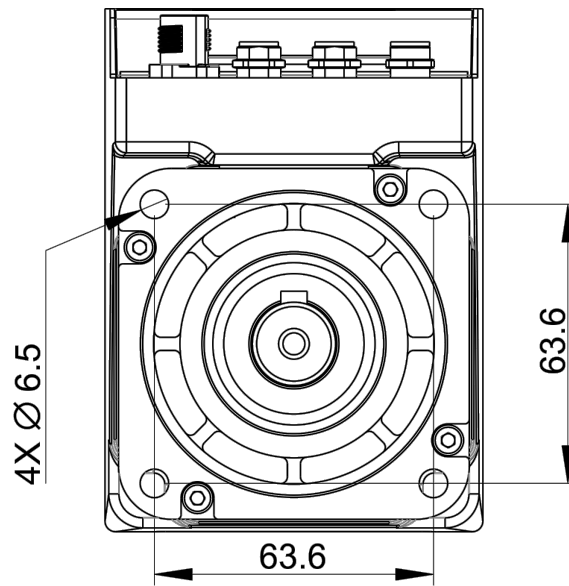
Front View Details and Rotor Shaft/Keyway Details
